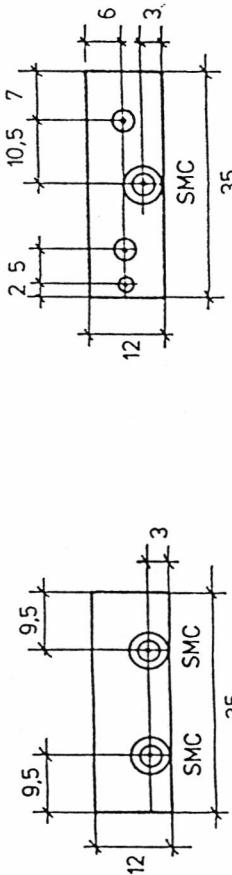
End plate dimensions for DL1RQ 706
